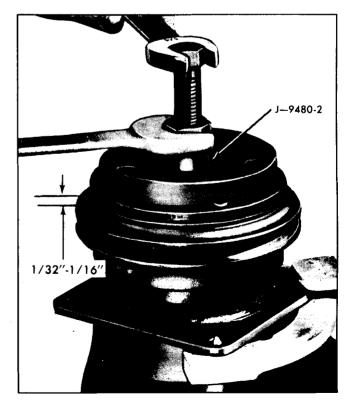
A-65 Installing Hub and Drive Plate Assembly
